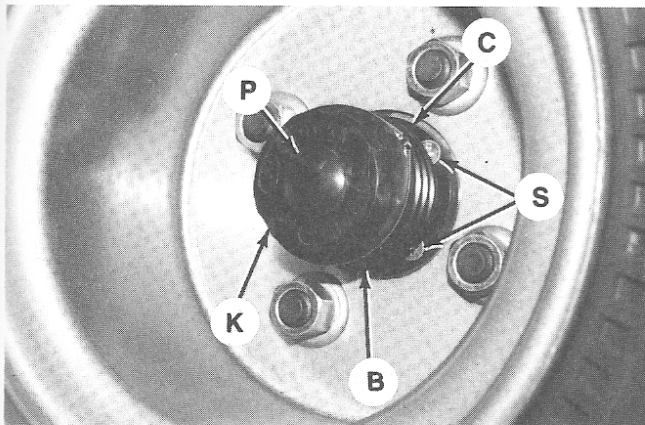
Left axle nut is accessible on KLT200-C1, KLT200-C2, KLT250-C1, KLT250-C2, KLT250-C3 and KLT250-P1 models after removing differential shifter. Refer to text.
